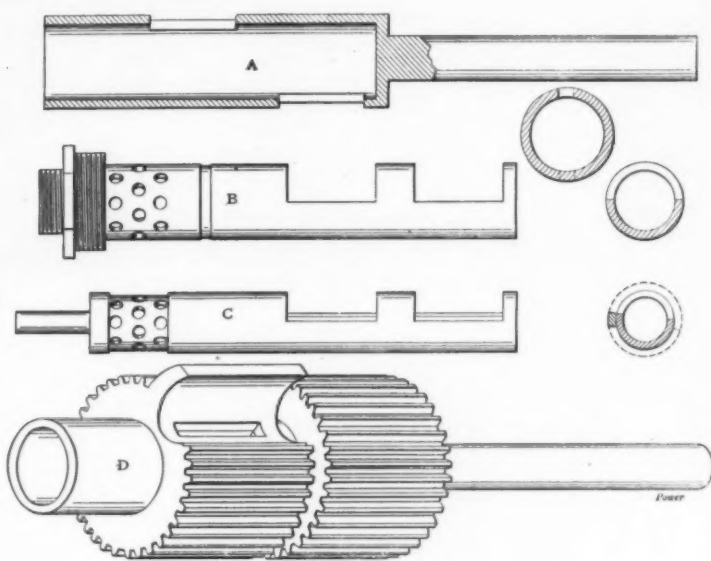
DETAILS OF VALVE AND ROTOR, KNOWLES ENGINE.
